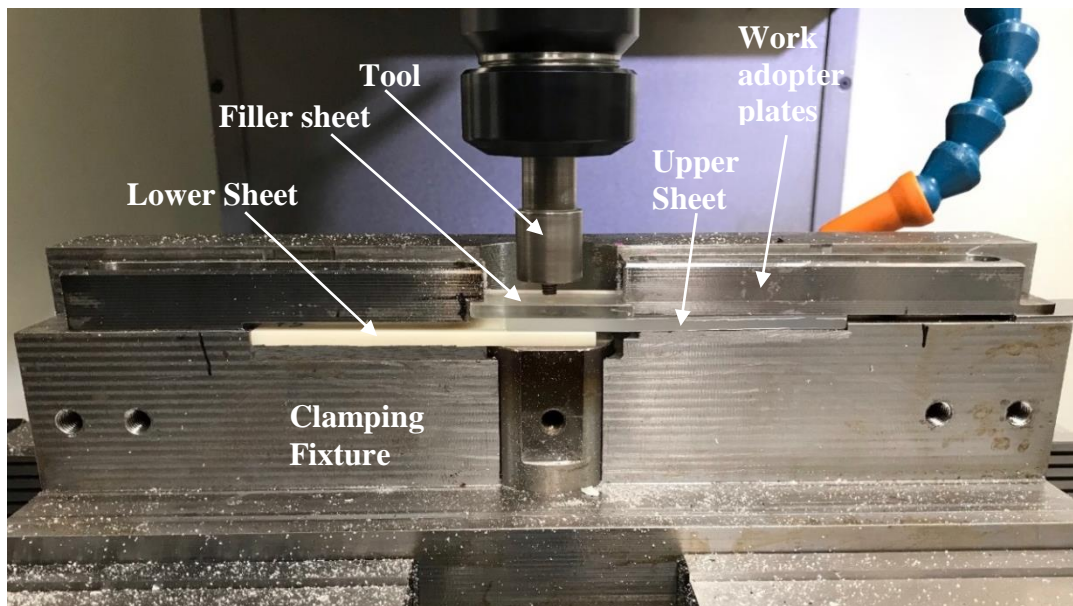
Welding positions of clamping apparatus, FSSW tool, and welding sheets for ABS-PC joints.
